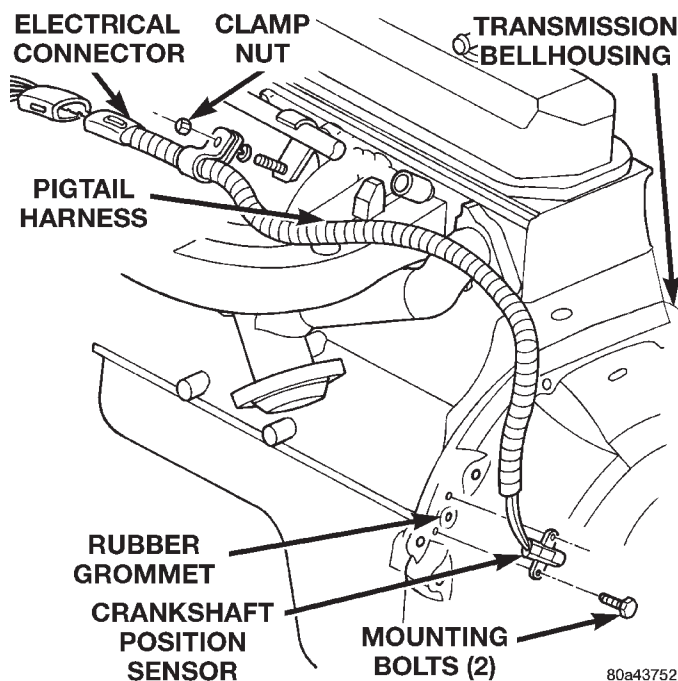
Crankshaft Position Sensor —4.0L Engine
